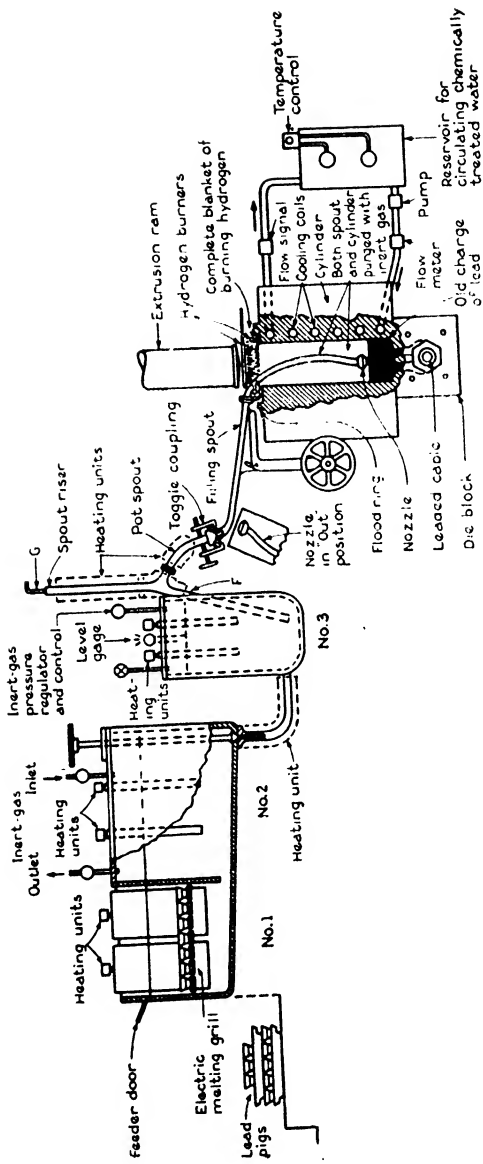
Complete sequence of melting and casting for the “nozzle-swirl” process.
